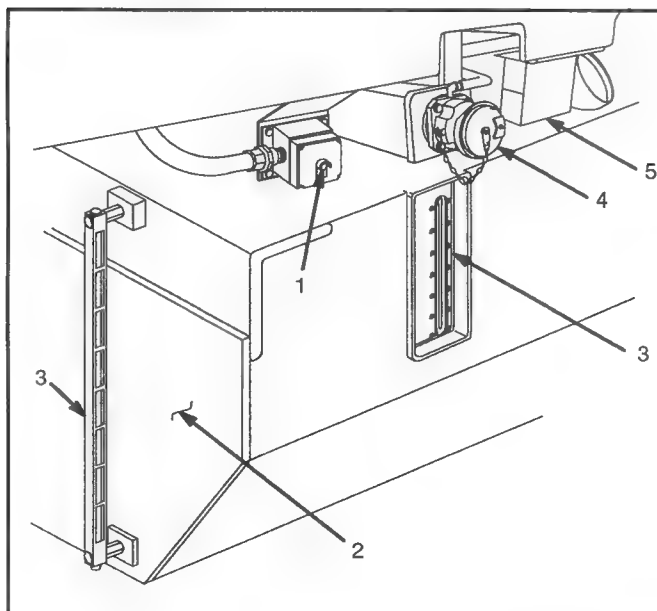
DIESEL ENGINE LUBE-OIL DIPSTICK AND FILL. E-32795A.
